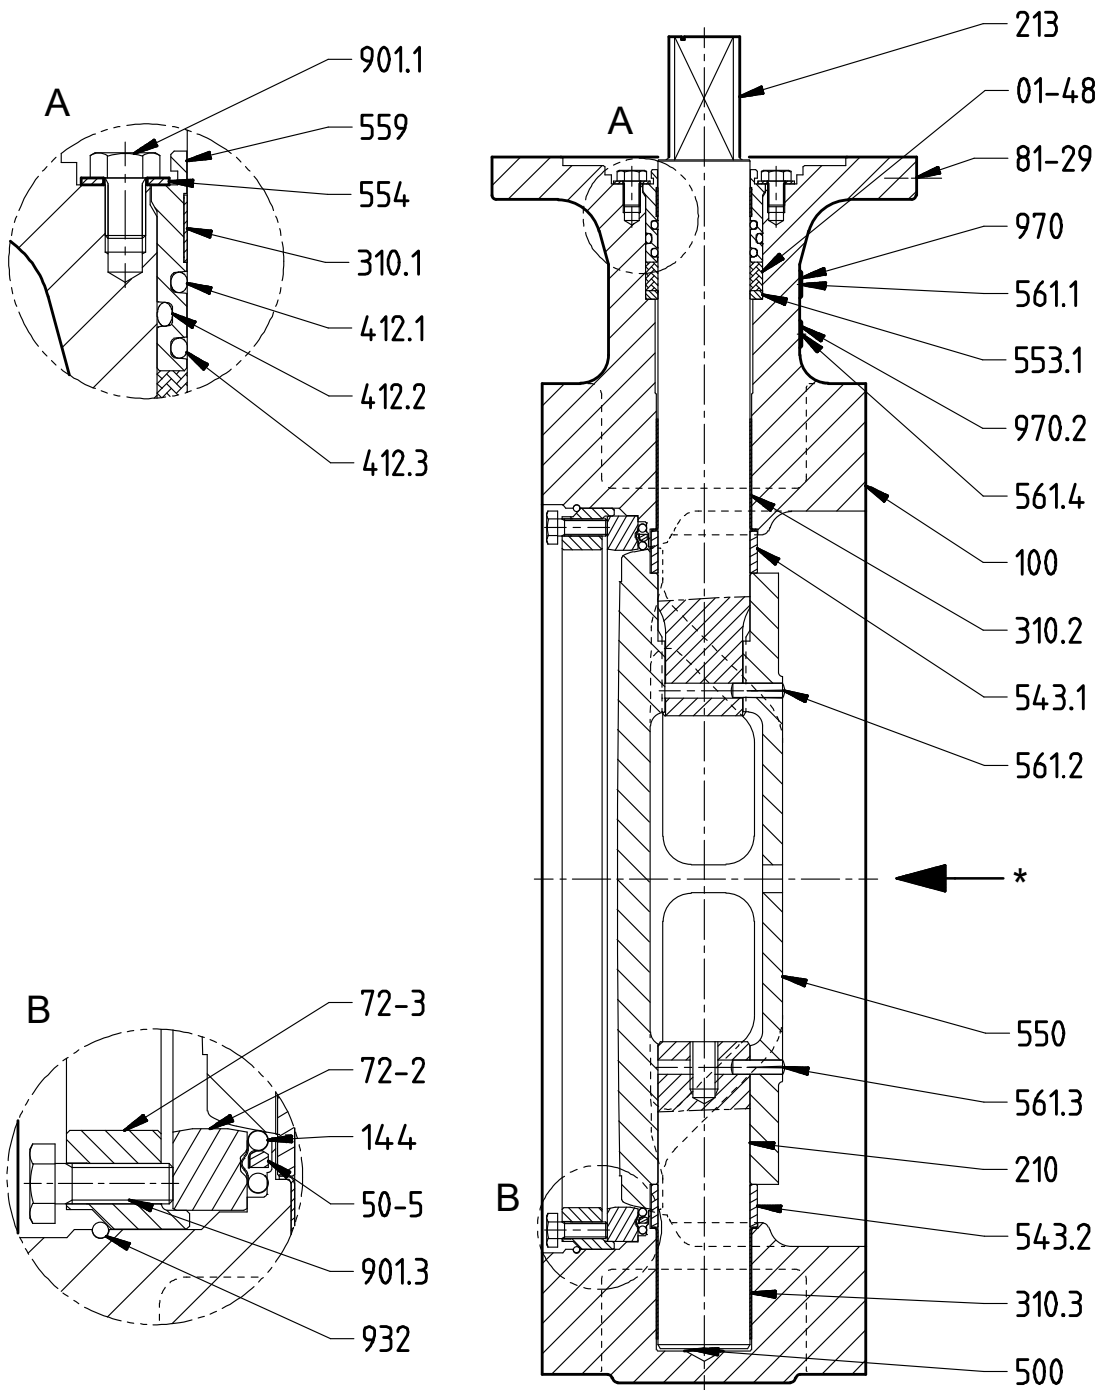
Sectional drawing of TRIODIS 150 MT T7 - DN 300-600 (12-24 inch)
